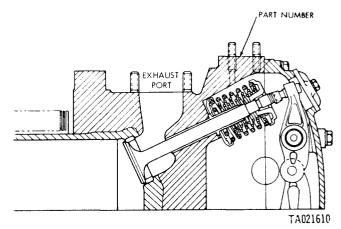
Location of standard and oversize cylinder assembly identification numbers.
